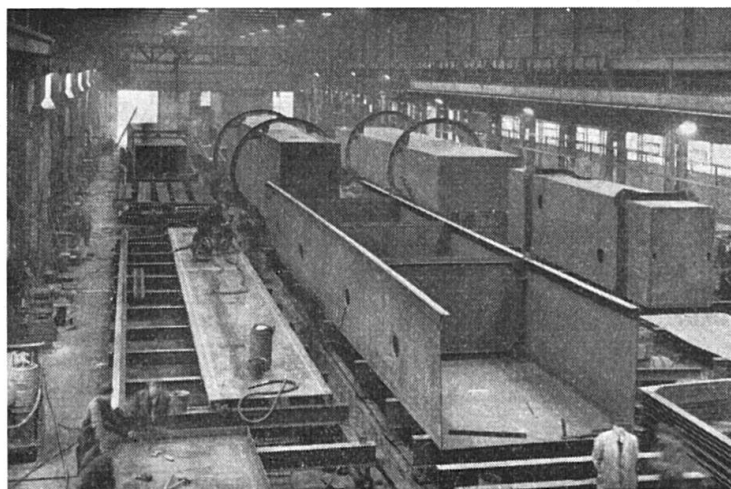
Purpose Made Manipulators in Use for Welding pontoons.
